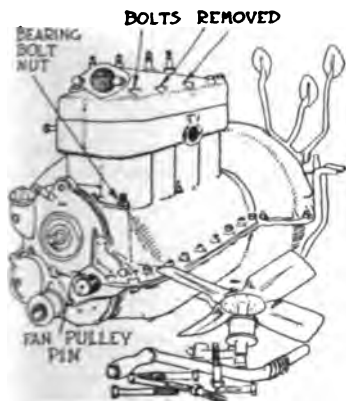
Ford engine prepared for installation of Westinghouse starting and lighting
